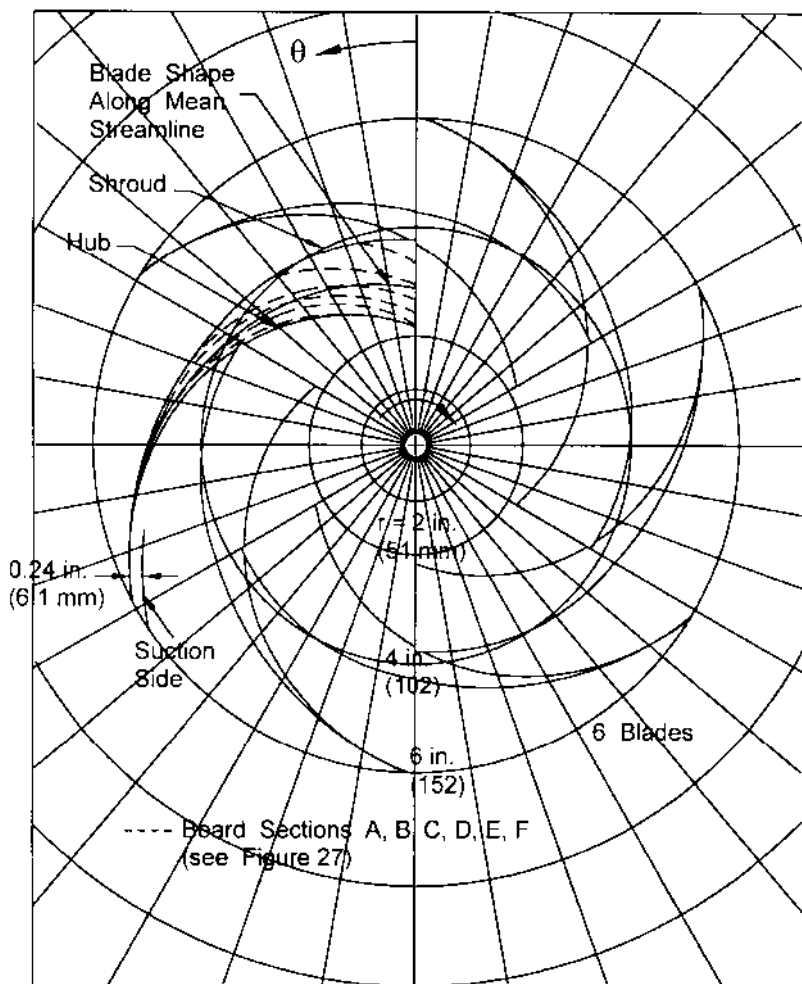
Impeller blading—polar view, showing pressure sides of the blades (design example)
